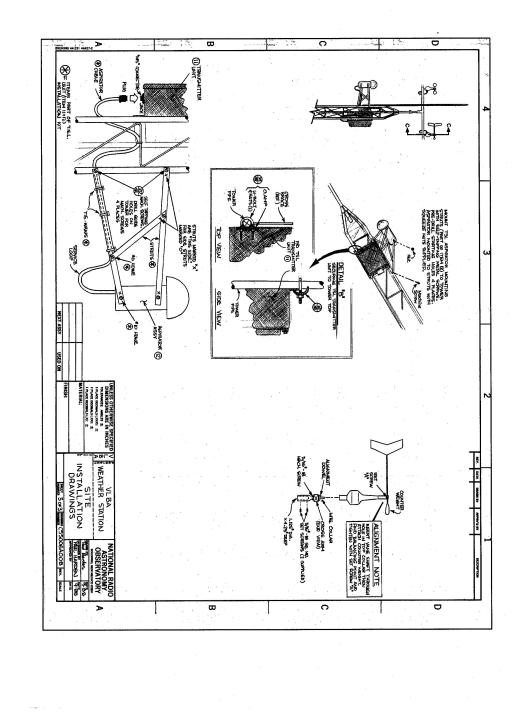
VLBA Weather Station Site Installation Drawings, C55006A008-3
